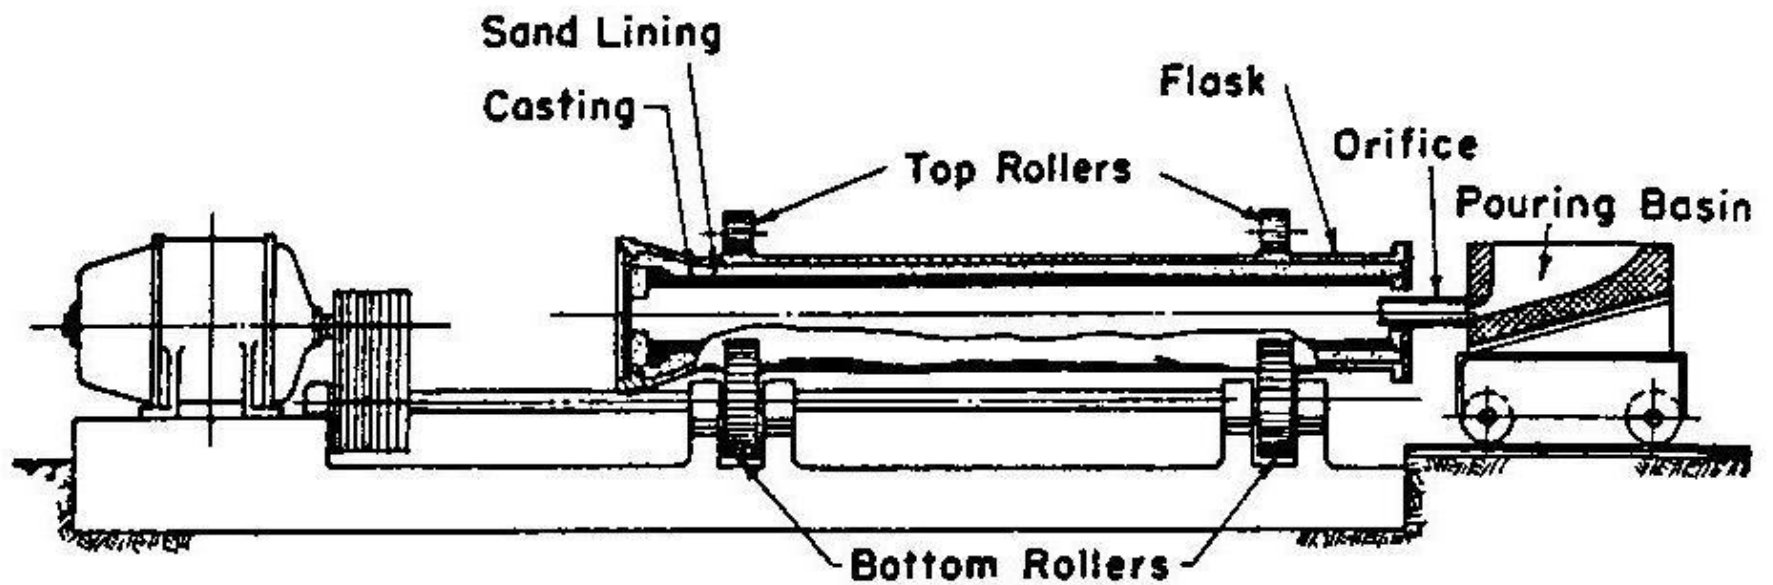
Schematic representation of the true horizontal centrifugal casting machine.
